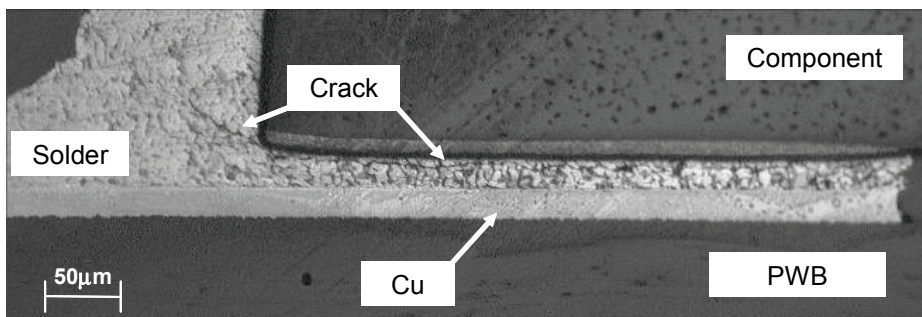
Microsection of SnPb solder joint of a ceramic leadless component after accelerated stress test. Crack paths are already starting to propagate. The electrical and mechanical properties of the solder joint have degraded (refer to Fig. 6). Such solder joints might be seen as degraded product performance.
